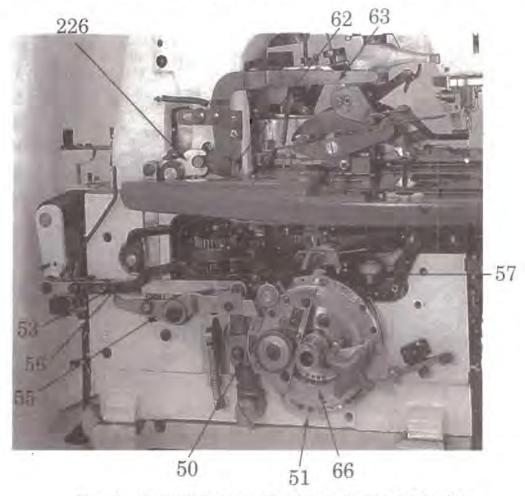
View of Pattern Wheel and Sewing Mechanism
